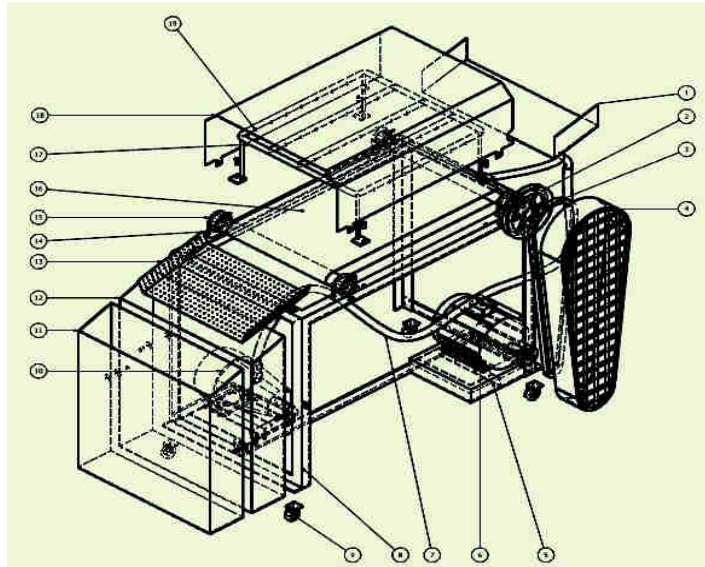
Exploded View of the Fruit Washing Machine: 1-Feeding Tray; 2-Pulley; 3-Belt; 4 Belt Guard; 5-Motor Seat; 6-Electric Motor; 7-Hose; 8-Frame; 9-Roller; 10-Water Pump; 11-Fruit Collector; 12-Water Tank; 13-Drain Net; 14-Shaft; 15-Bearing; 16-Conveyor Belt; 17- Pipes; 18-Washing Chamber; 19-Nozzle or Jet
